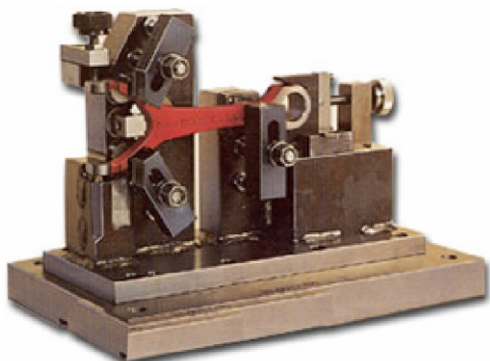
Dedicated fixture for a part for the construction machinery (BLUCO corp.) [30].
